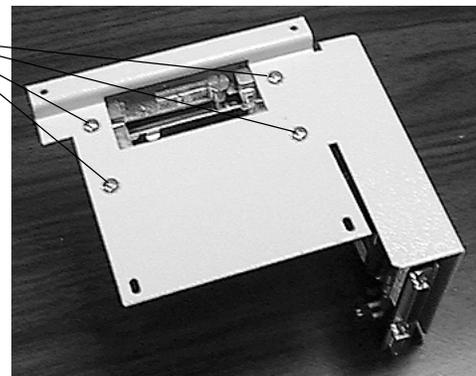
The location of the 4 screws and washers that are removed to free the Printer Mounting Bracket from the front Panel. The two bottom screws are located under the cable clamps.
